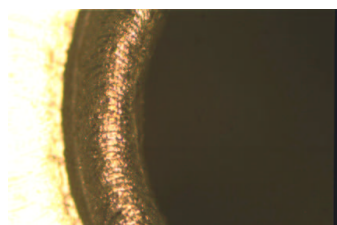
High quality welding seam between a cooling tube (right side) and the container (left side).
